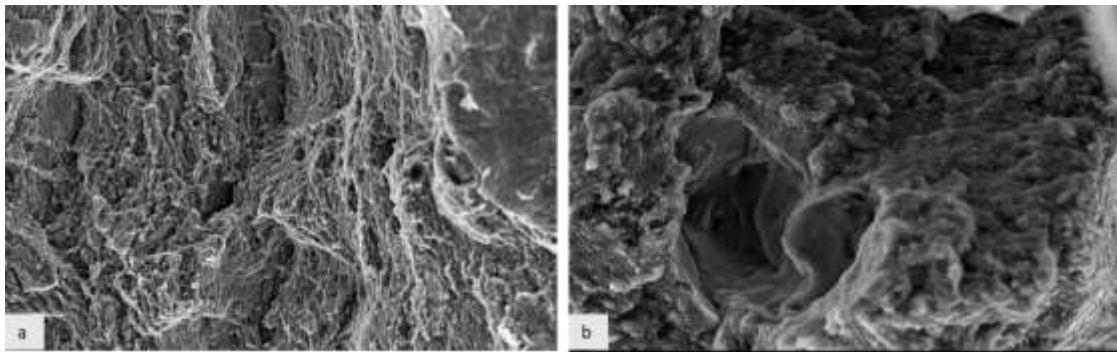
Fracture Surfaces at a) 2500x b) 8000x magnifications
